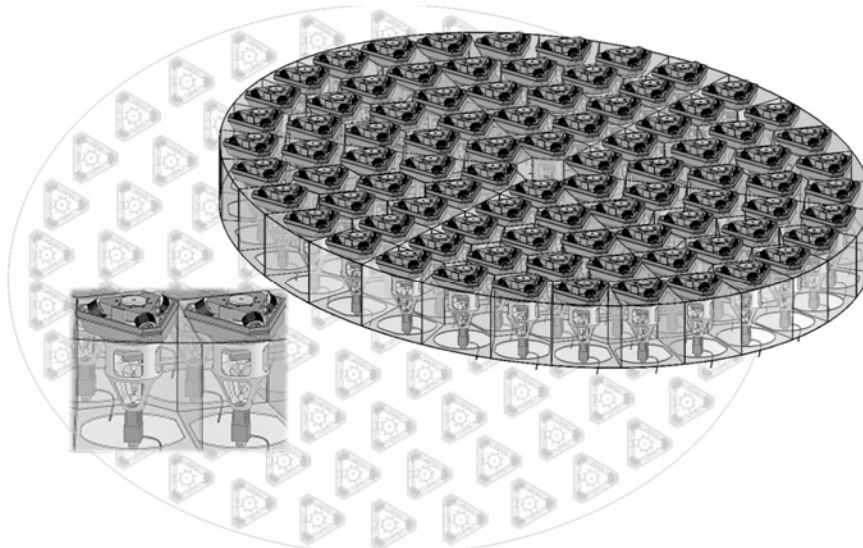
All sixty actuators installed within the M3 cell. Actuator design allows disassembly through back face of cell. After first removing active portion of actuator (lower section), interface between actuator and bonded pad can be separated, allowing removal of the passive section (upper portion) as a unit.
